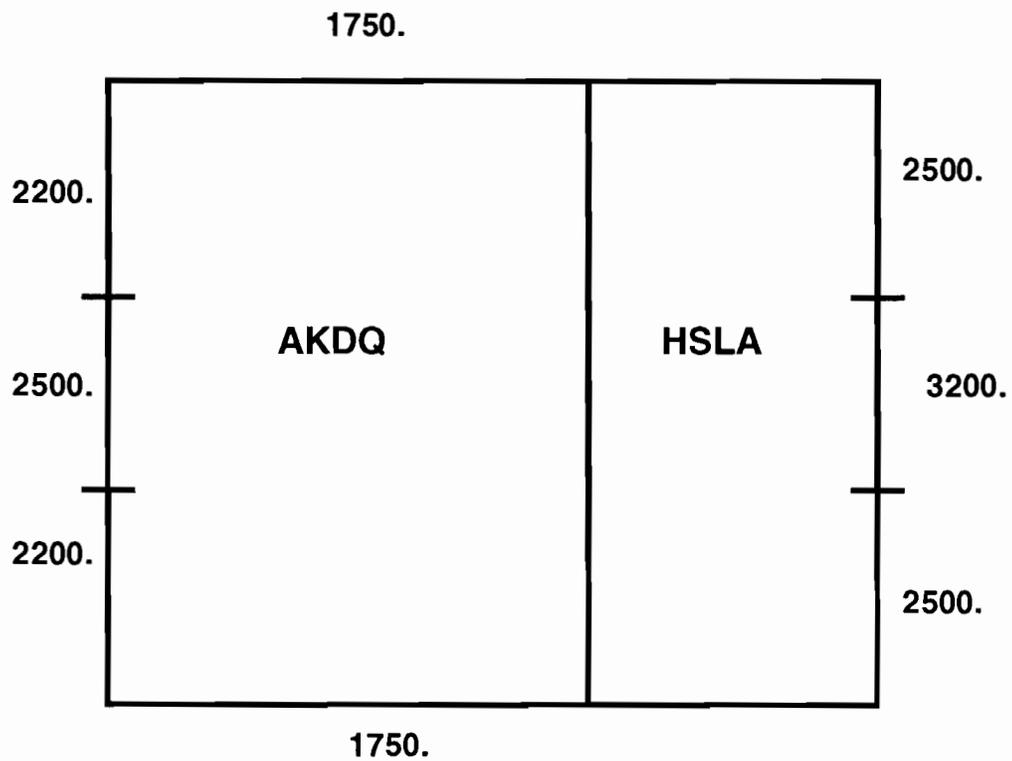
The blank holder forces fit to experiment used around the edge of the blank for the blank with the weld located 4" from center, lubricated.
